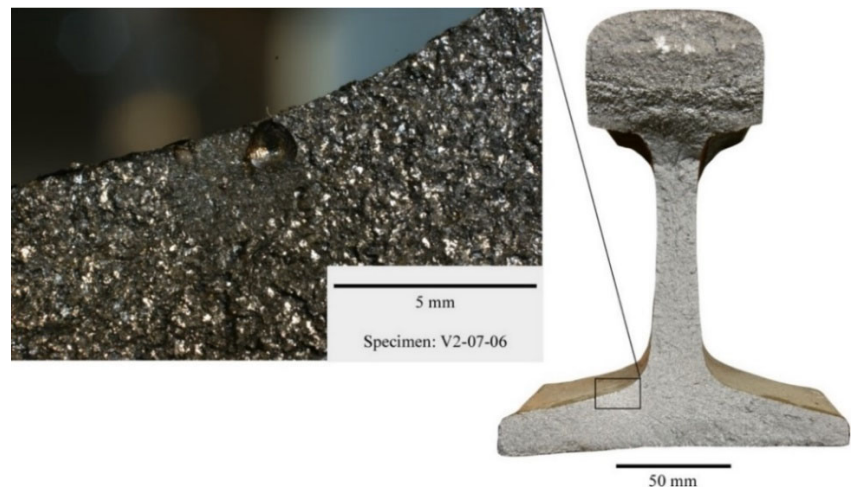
Photograph of a thermite rail weld fatigue specimen.
